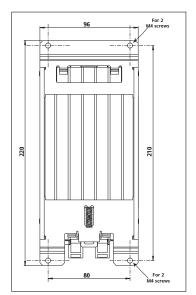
Bulkhead mounting - 16 A to 40 A units
